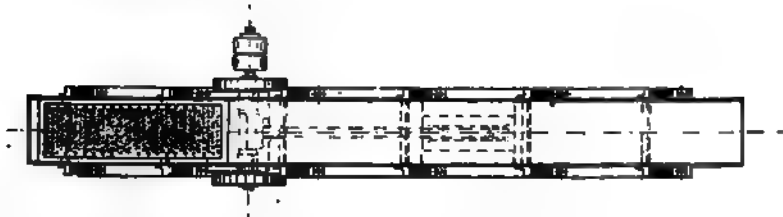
Swinging Conveyor as used for Draining Purposes in connection with Coal-washing Plant.
